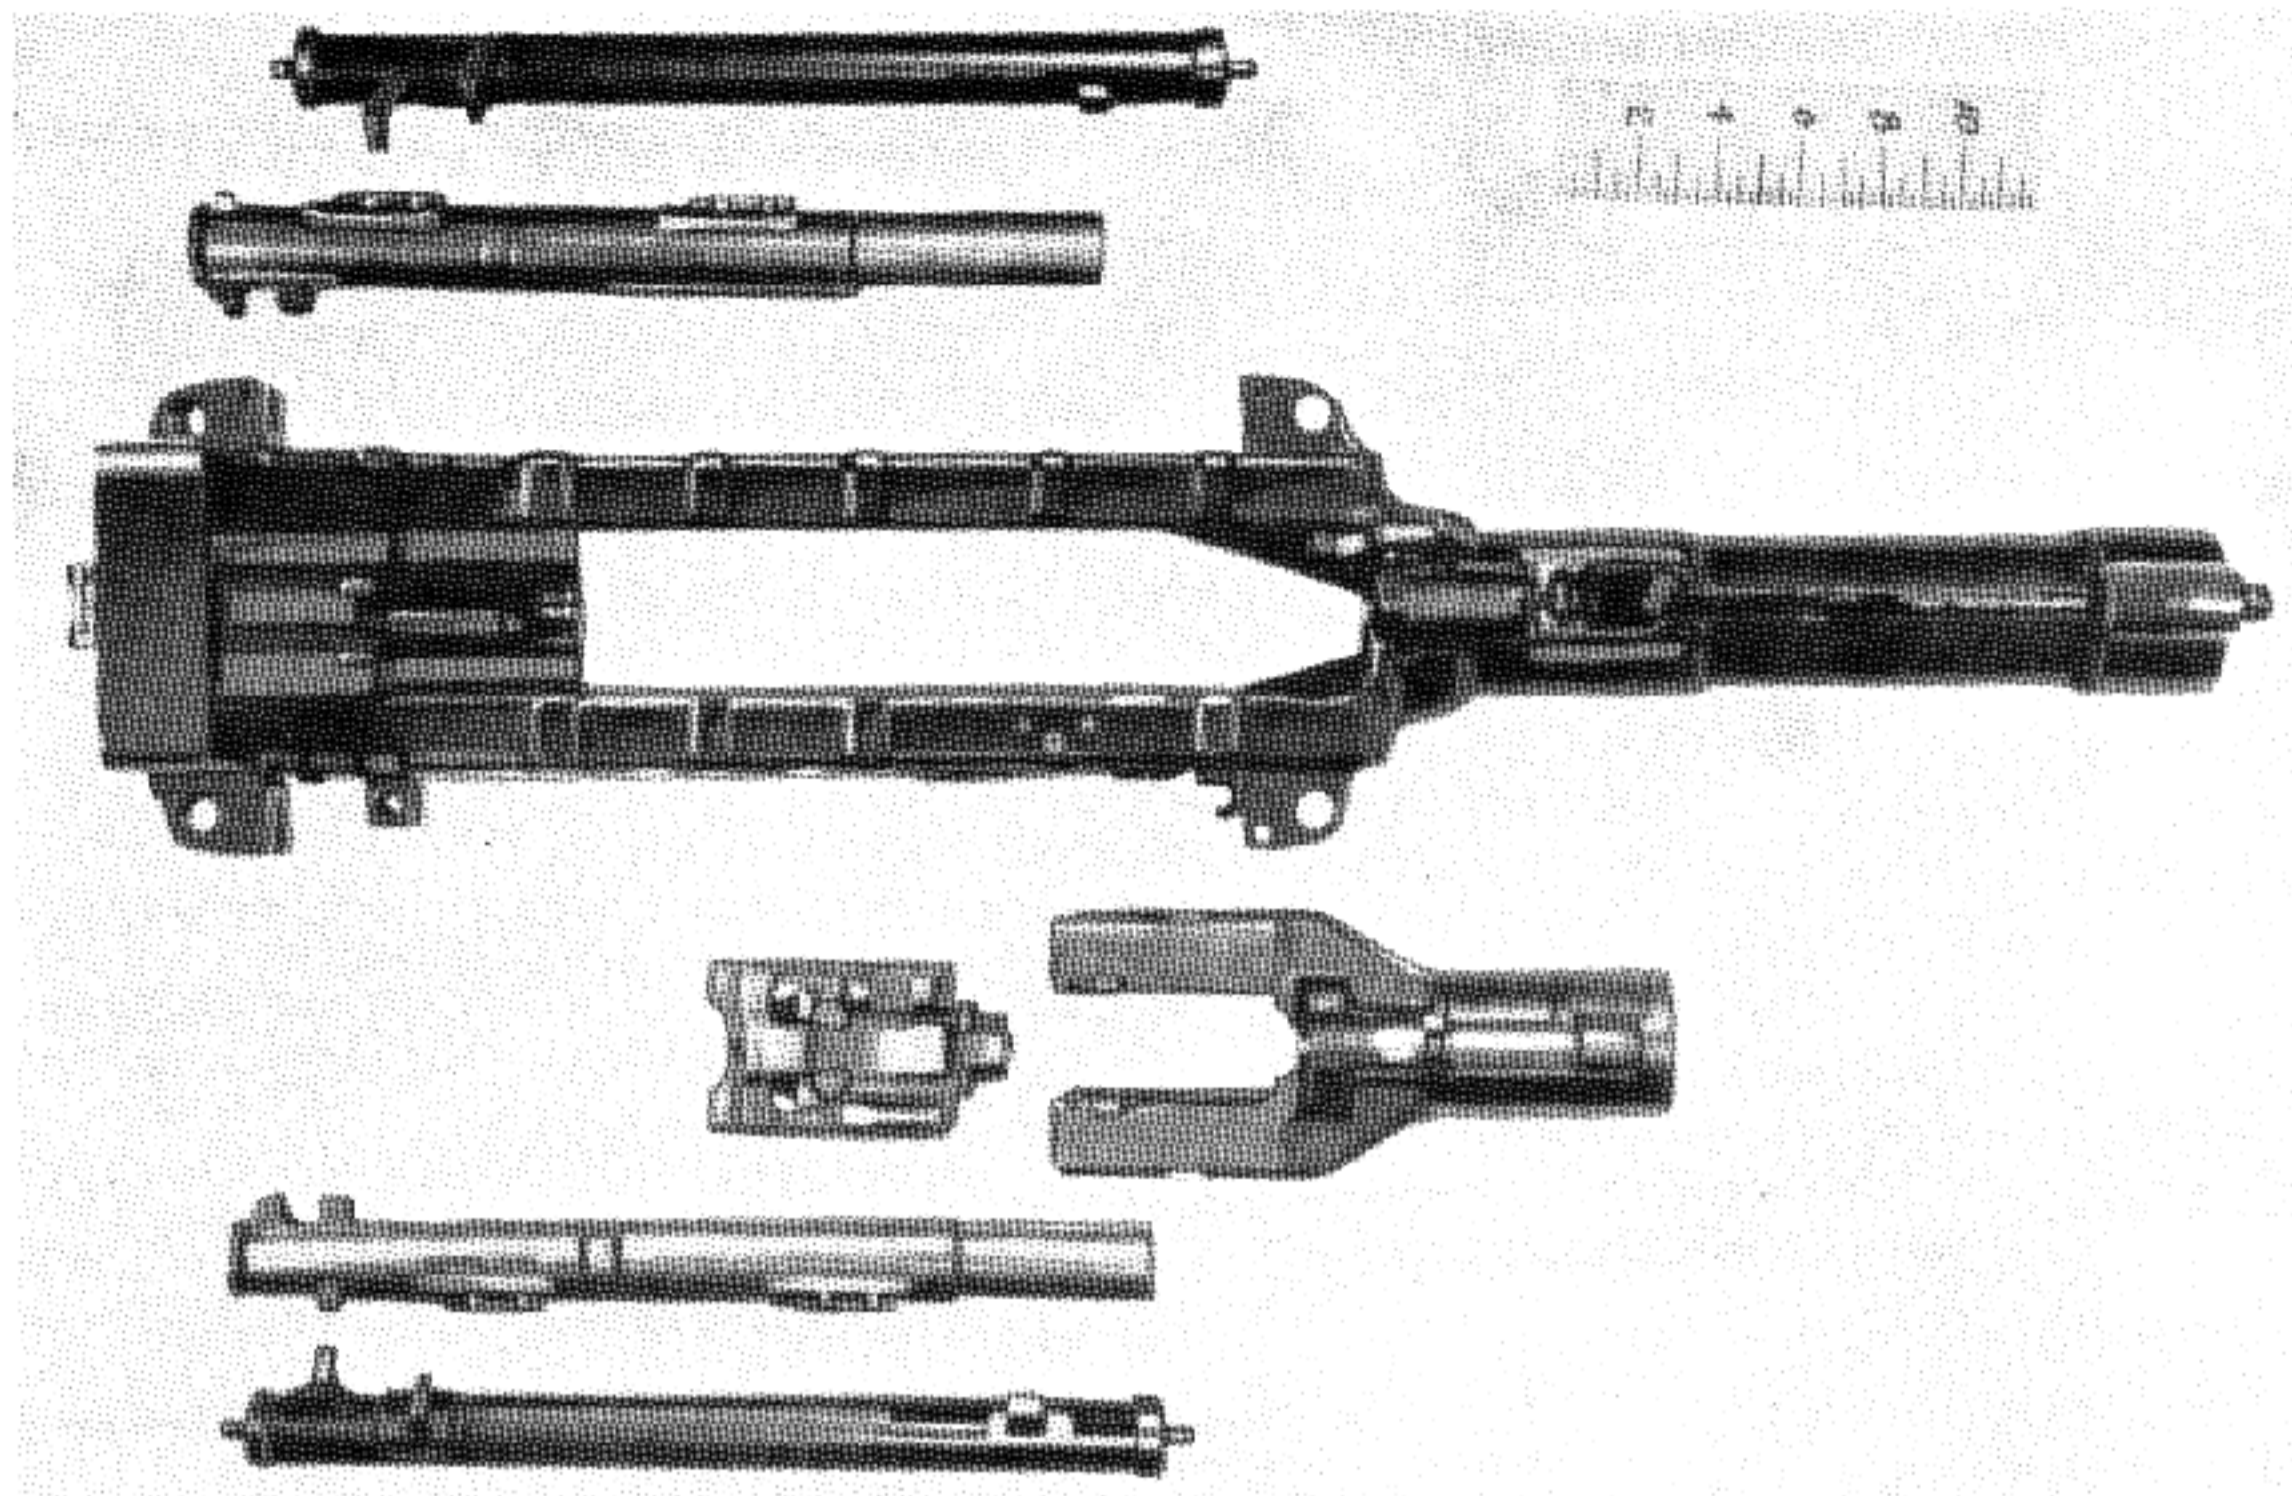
Breech mechanism of Automatic Aircraft Cannon 30-mm MK-103. Disassembled view.
